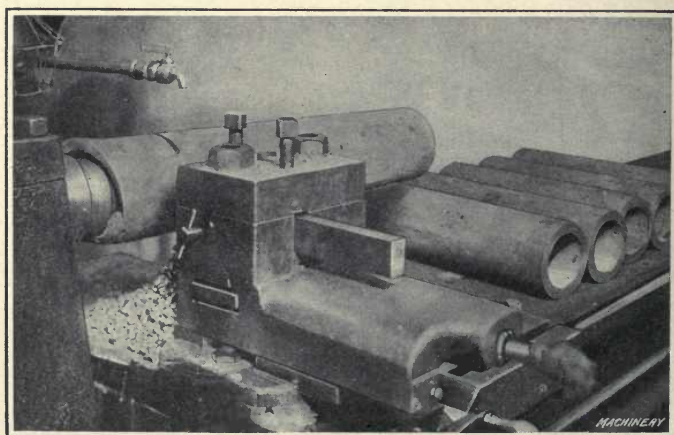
Cutting off Open End of High-explosive Shell Forging
